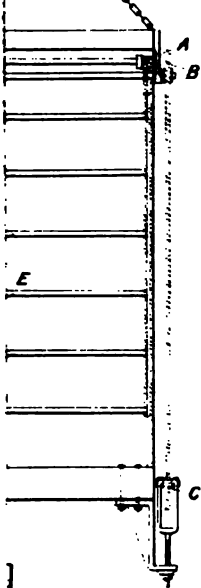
SIDE ELEVATION: CAGE LEAVING BOTTOM
